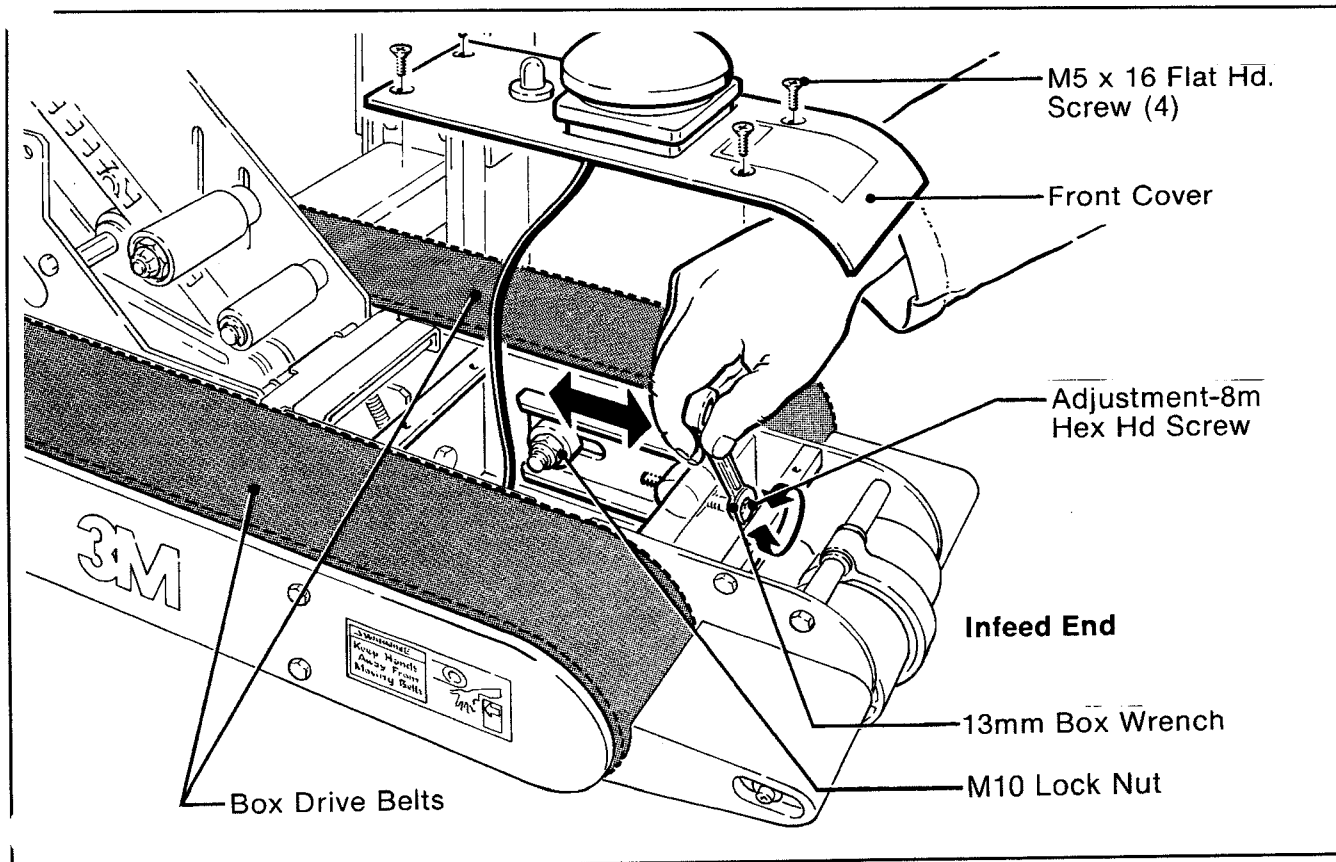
Box Drive Belt Tension Adjustment, Upper Belts (Infeed End)
